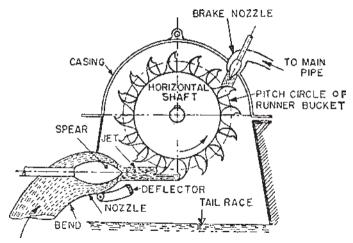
Single-jet, horizontal shaft Pelton turbine.
